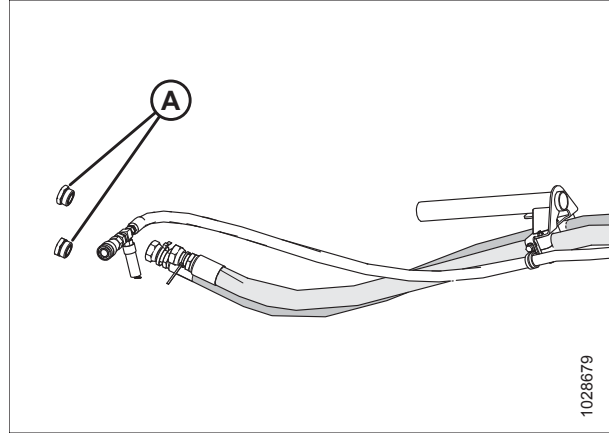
Protective Shipping Plugs on R216 Hydraulic Hoses
